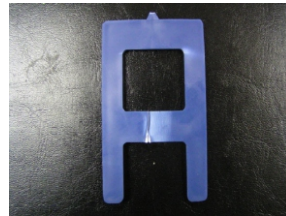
(b) Weld line formed by hot melt which results in ductile fracture
